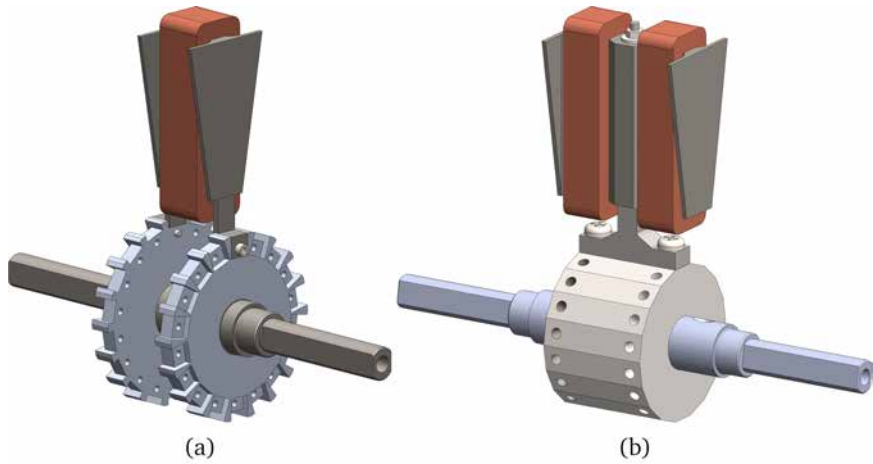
The assembly of a segmented stator tooth and hub. (a) The bonded RE magnet SAT PMBLDC motor. (b) The ferrite magnet SAT PMBLDC motor.
